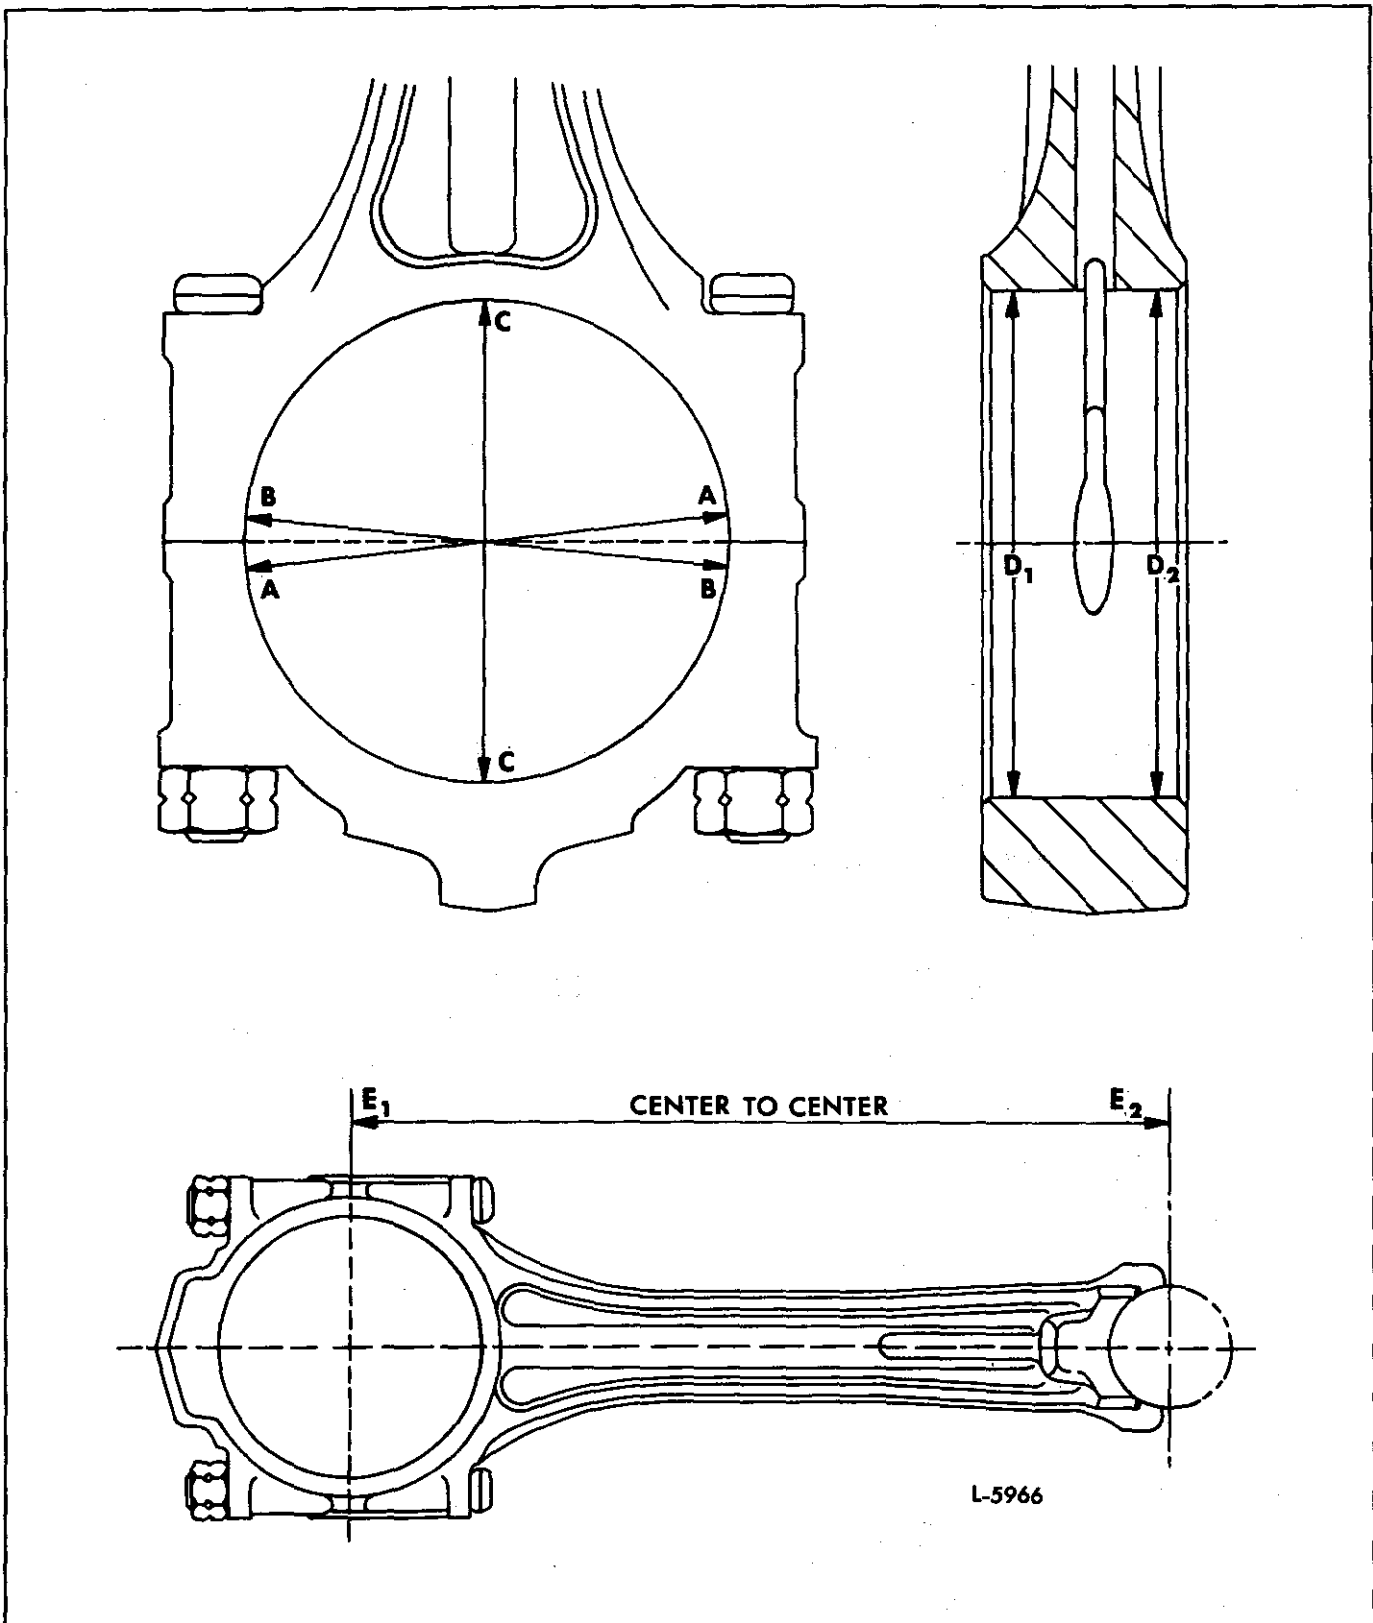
Dimensional Inspection of Cross-Head Piston Connecting Rods
